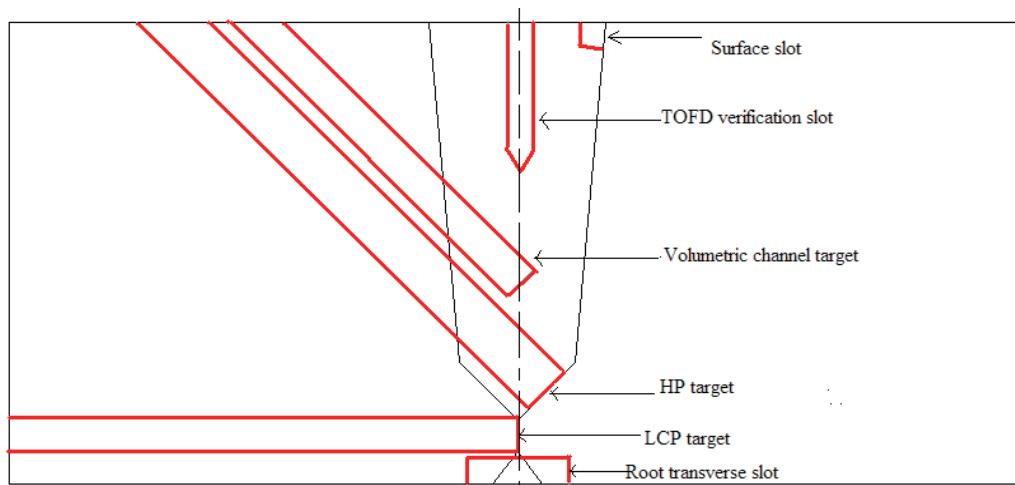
Illustration of weld bevel and targets
